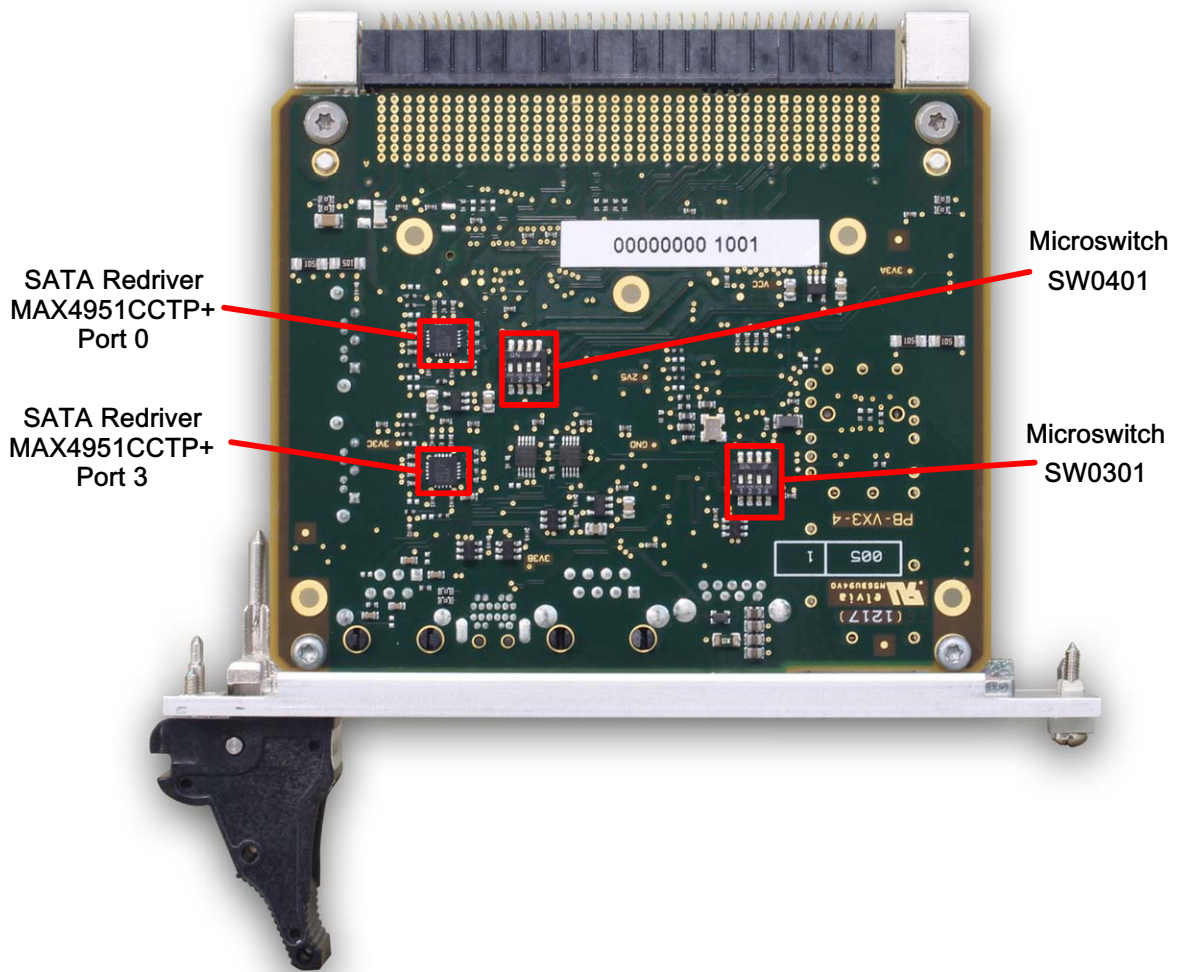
Component Layout of the PB-VX3-4xx Bottom Side
